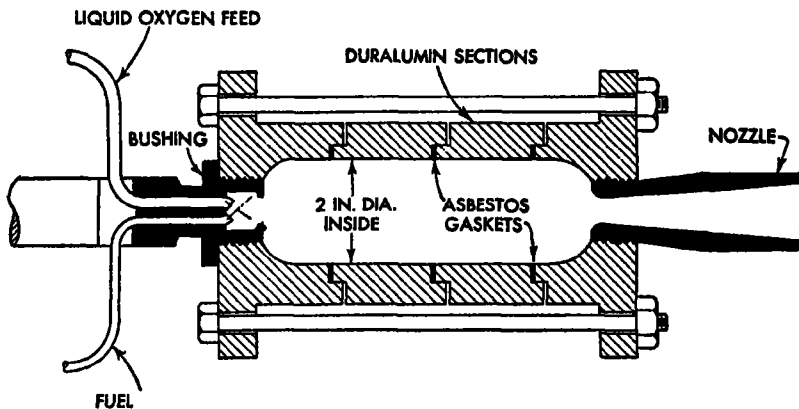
Sectional liquid-fuel motor used in the American Rocket Society's test stand experiments.
